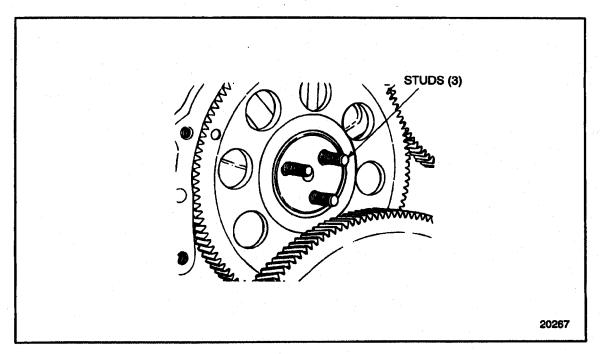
Adjustable Idler Gear Bolt Hole Location
